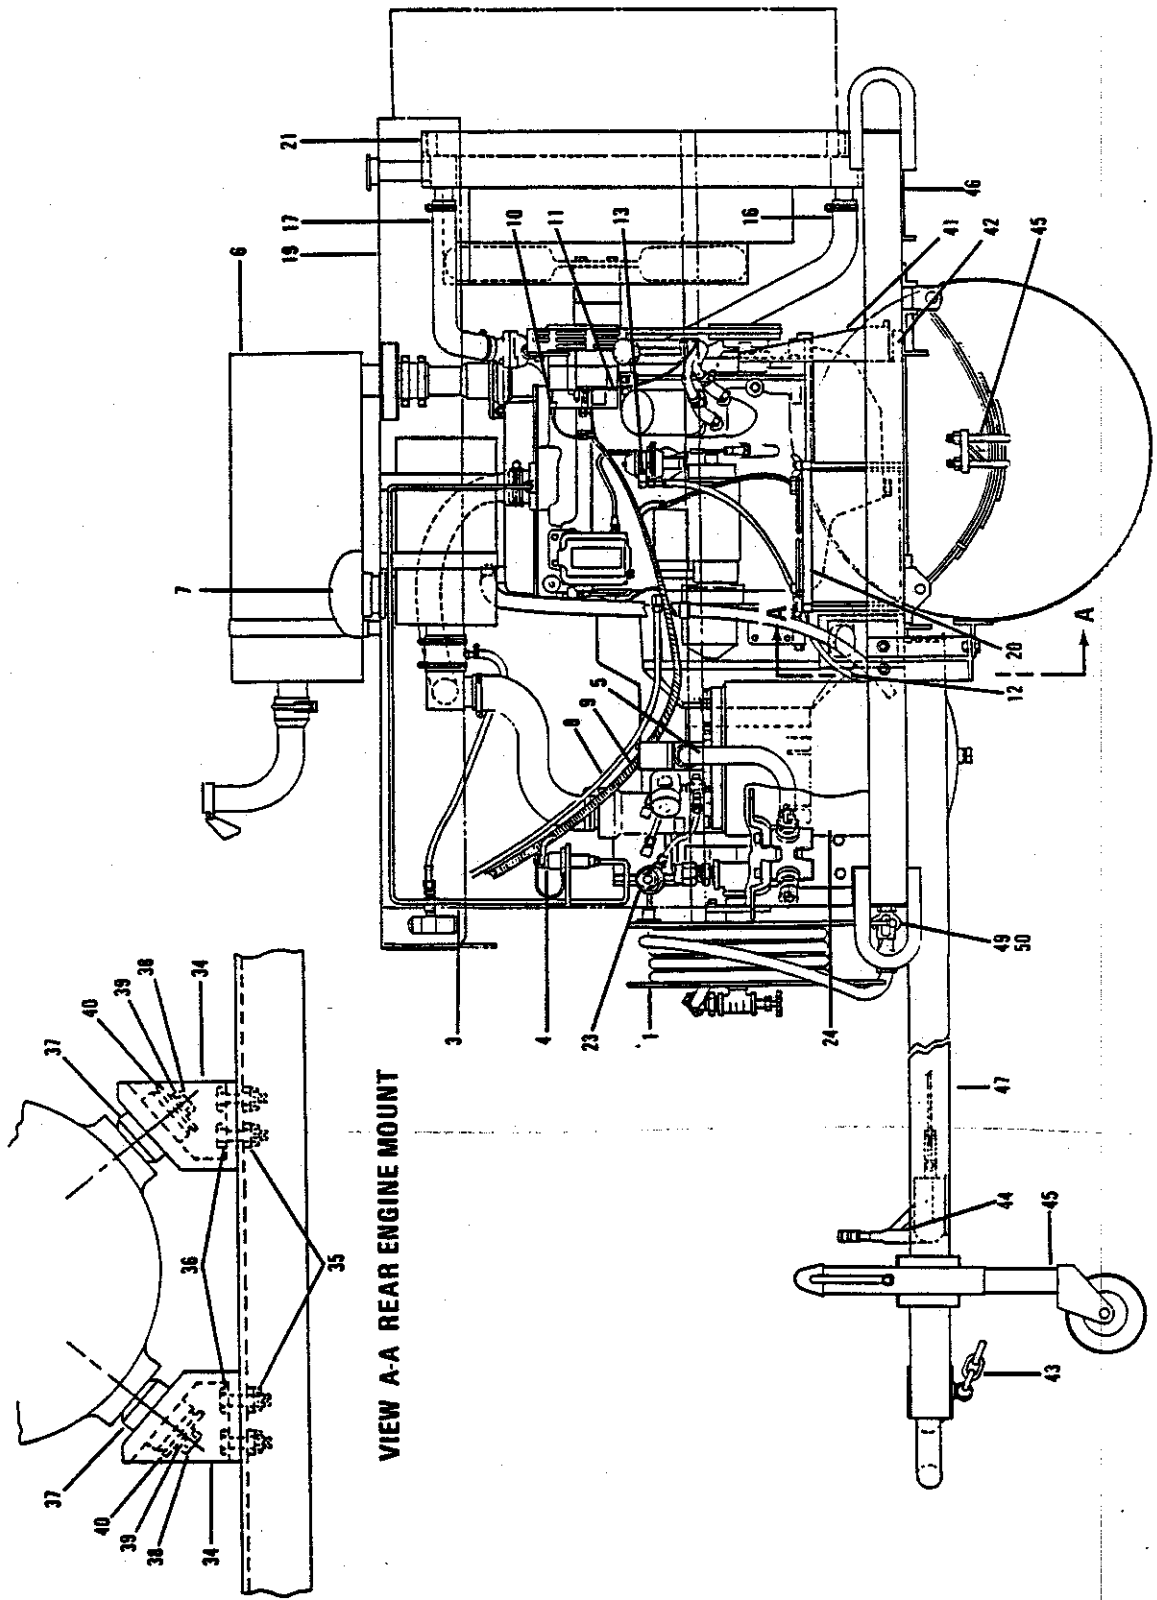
COMPRESSOR UNIT ASSEMBLY, MODEL 11M125RPDQ (SHEET 1 OF 2)
